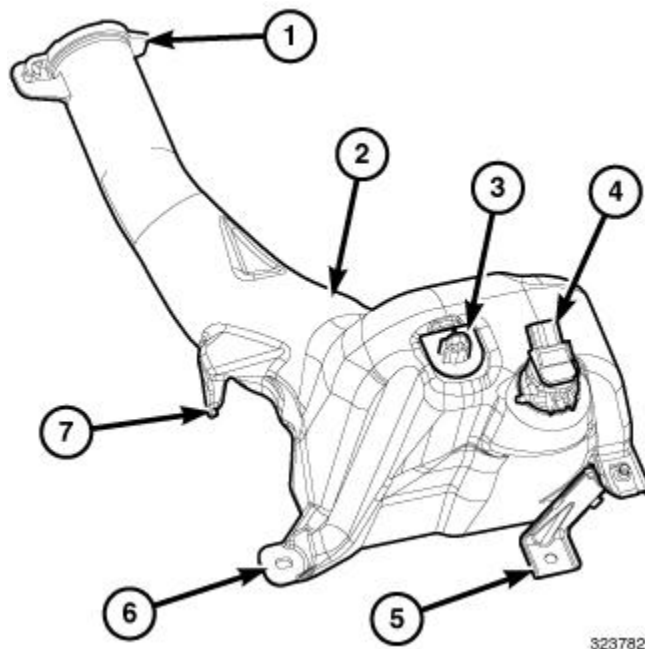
Fluid Reservoir, Filler Neck And Cap Unit, Washer Pump/Motor Unit, Switch, Locating Post, Mounting Tab & Mounting Bracket
